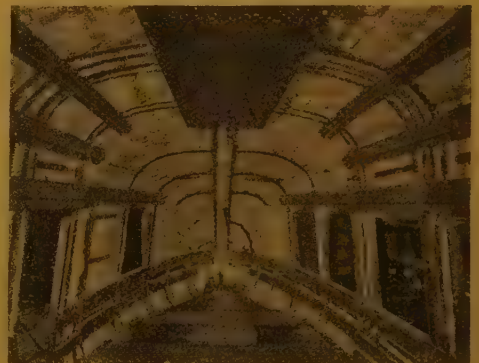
Interior view showing car-end details, including the application of Rokflos insulation.
